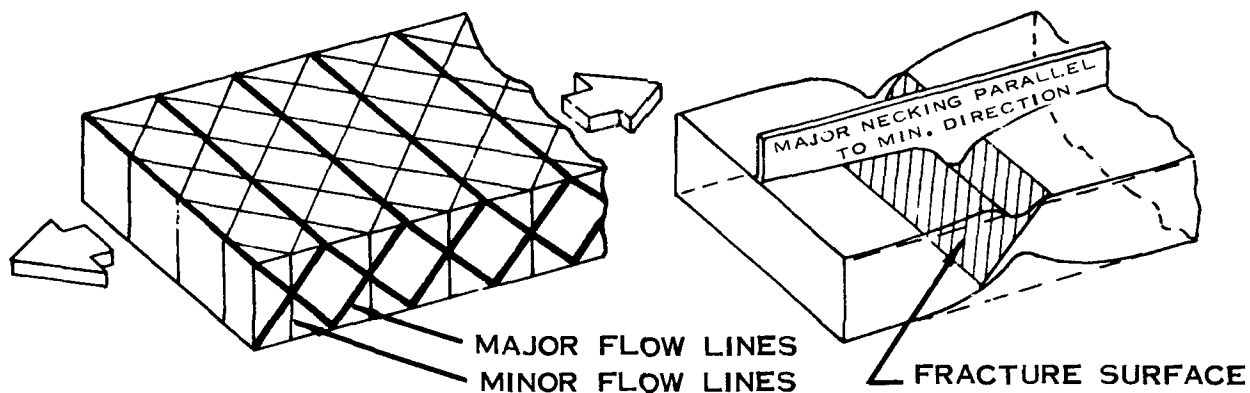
FAILURE OF THICK TENSILE SPECIMENS
